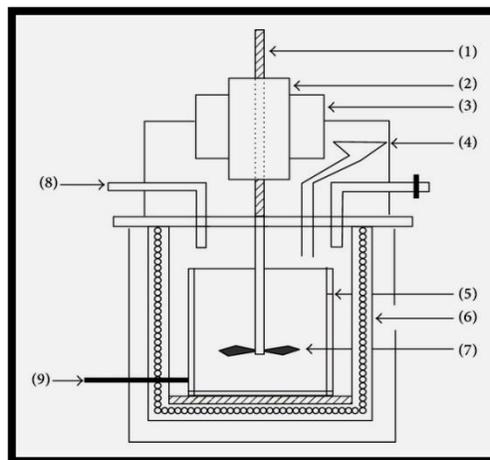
Schematic of stir casting process (1) Stirrer spindle, (2) Sliding mechanism with impeller position control unit, (3) Electric motor, (4) Sprue, (5) Crucible, (6) Electric furnace, (7) Impeller, (8) Argon gas inlet, and (9) Thermocouple
